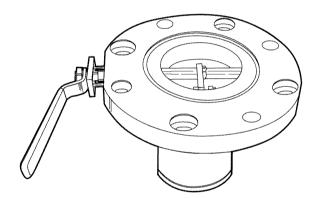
A — Suction Service Valve Locking Device, Closed and Unlocked
